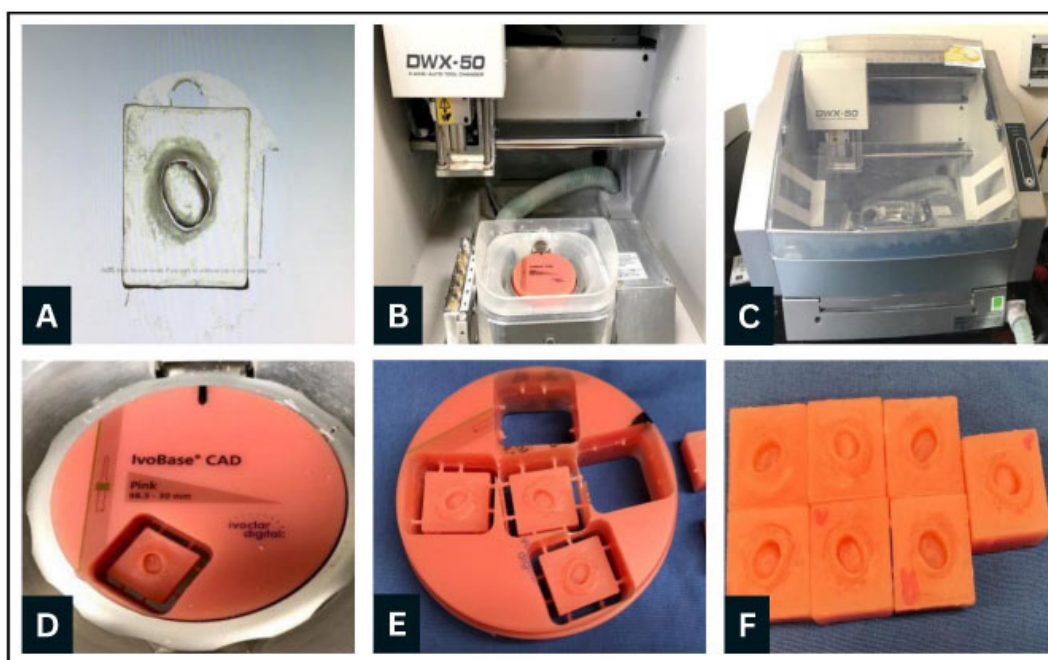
(A) Conversion of the scanned specimen into an STL file. (B-D) Digital design and milling of the specimens using the Roland DWX-50 milling machine. (E, F) Final CAD/CAM specimens after completion of the specimen preparation process.
